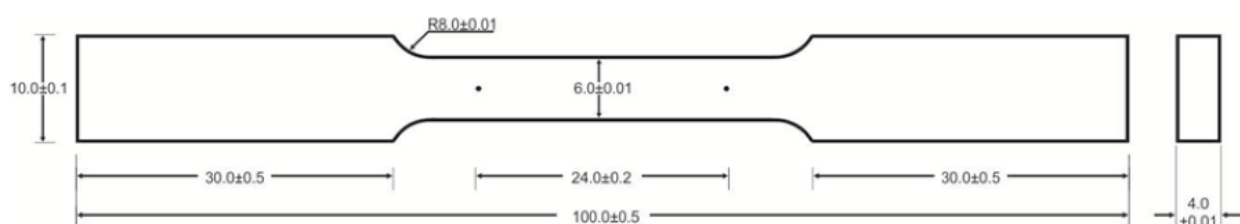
Specimen for tensile testing (all dimensions are in mm)
